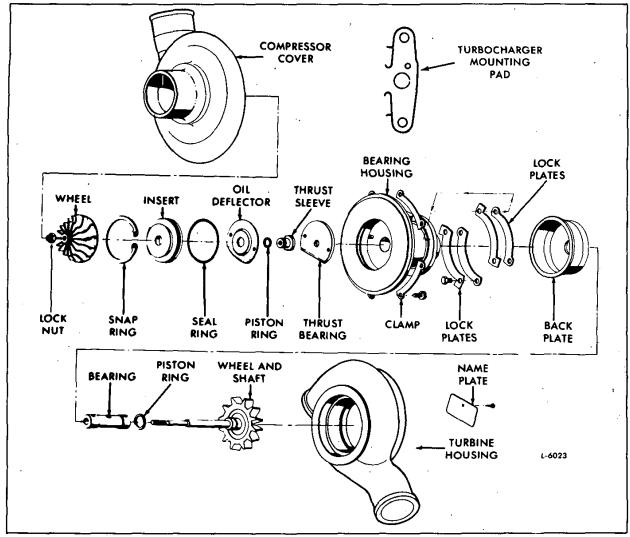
· Model 3LM Turbocharger and Relative Location of Parts
